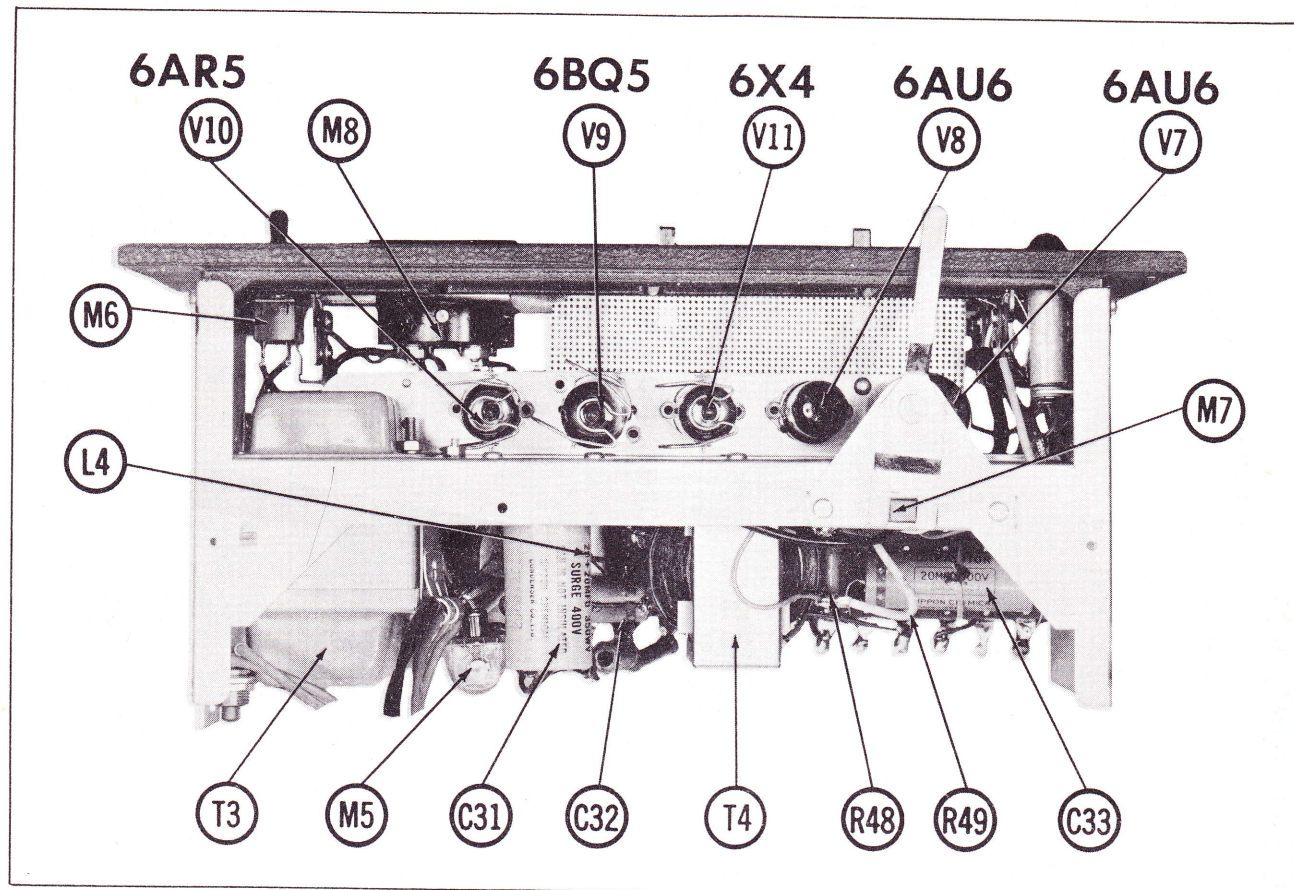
B EXPLODED VIEW OF PARTS BELOW BASEPLATE.
